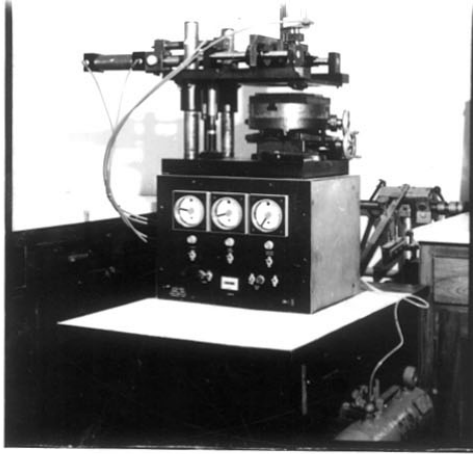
·7: AREMCO SCREEN PRINTING MACHINE (MODEL 3100)
